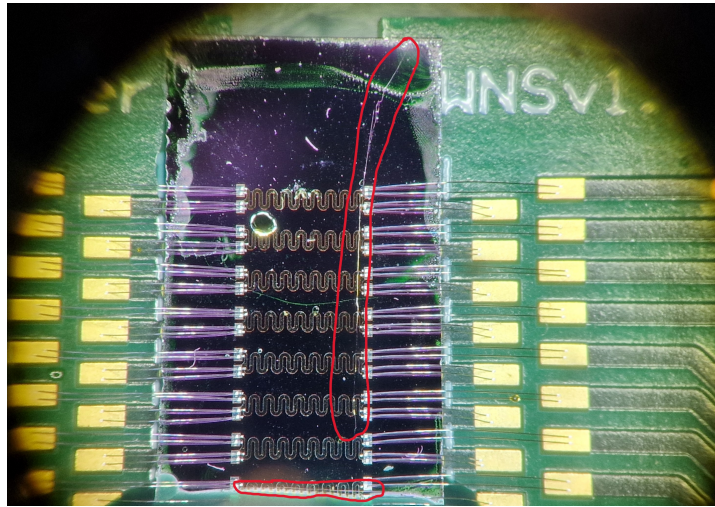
W6R3C02 thruster showing cracks on the heater side after temperature test. The cracks are encircled in red.
